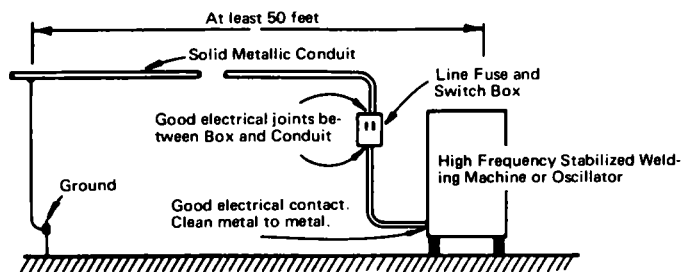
Power Service Installation H. F. Stabilized Arc Welding Machine
